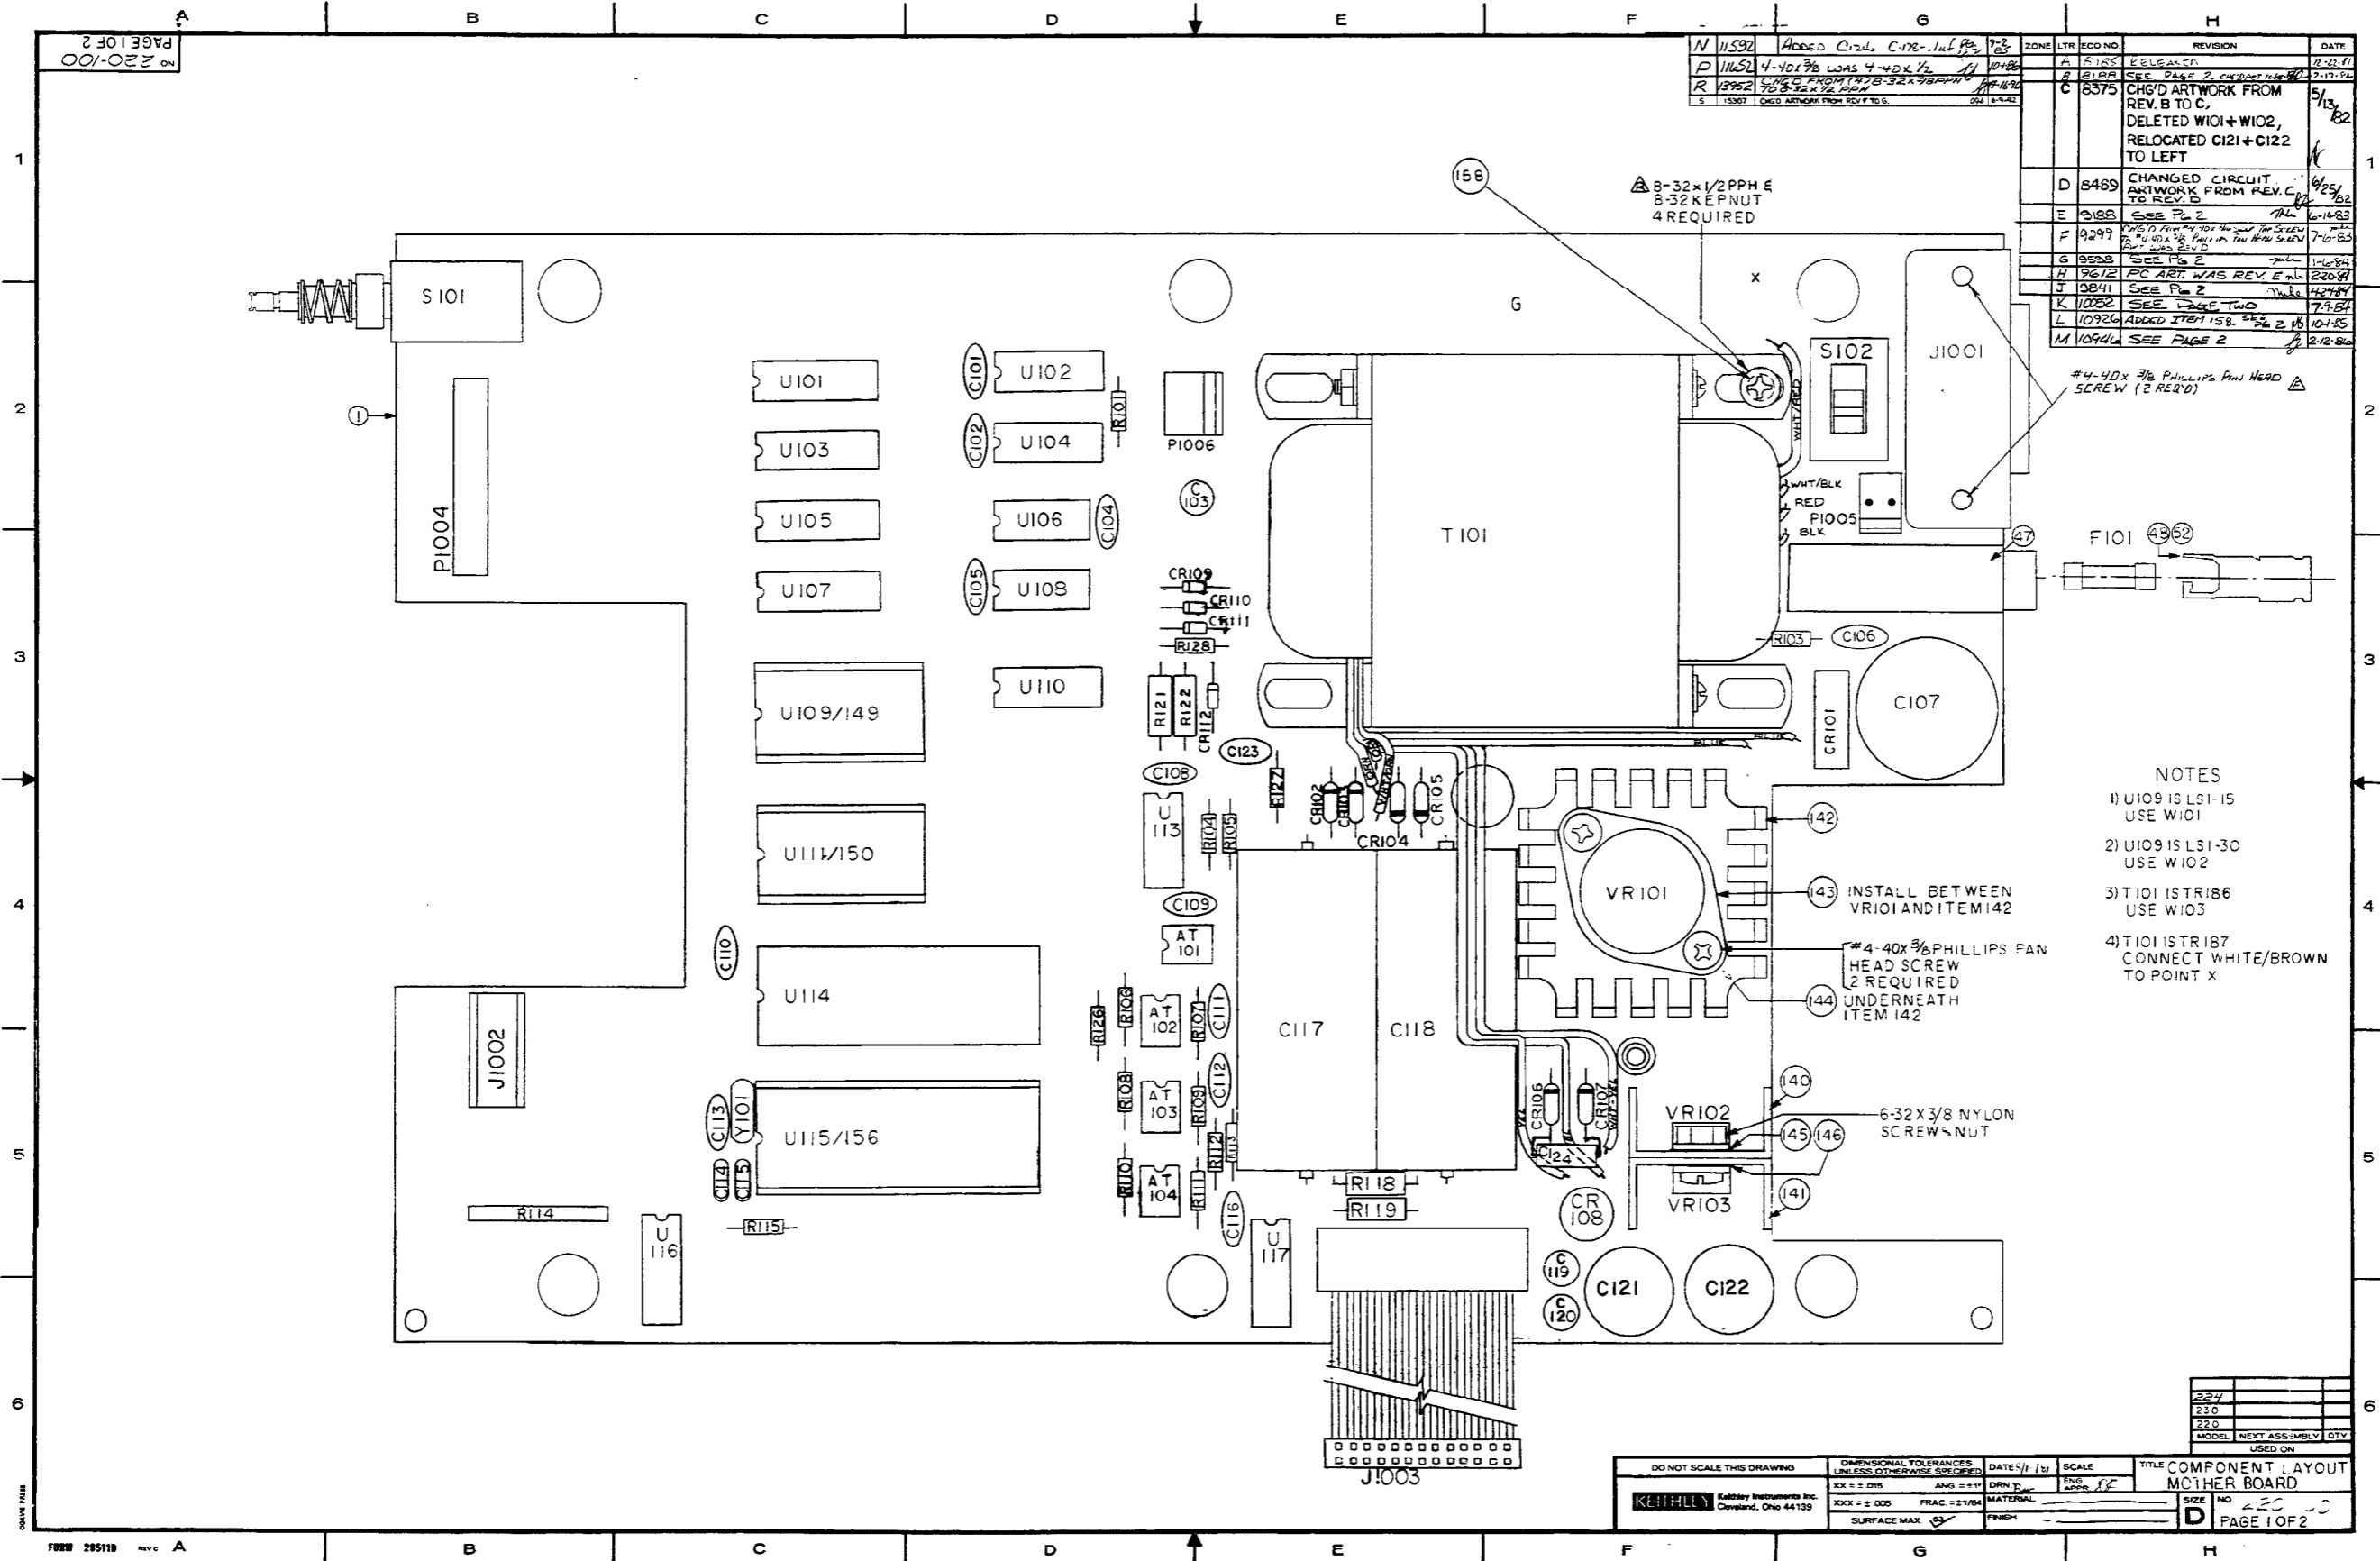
Mother Board, Component Location Drawing, Dwg. No. 220-100 (sheet 1 of 2)
